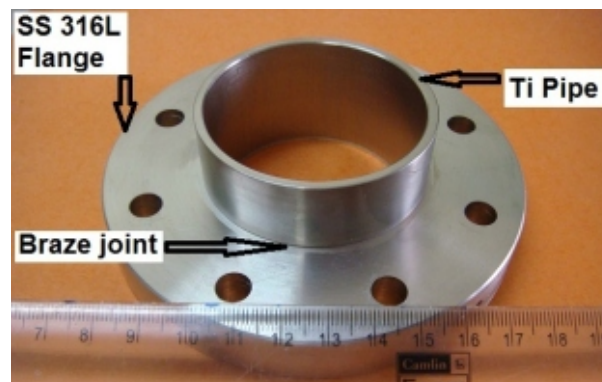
Vacuum brazed Ti-pipe/SS316L flange
